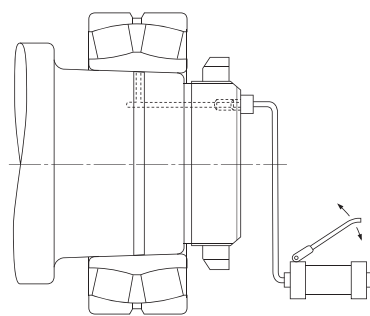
Removal Using Oil Injection Hydraulic Pump
